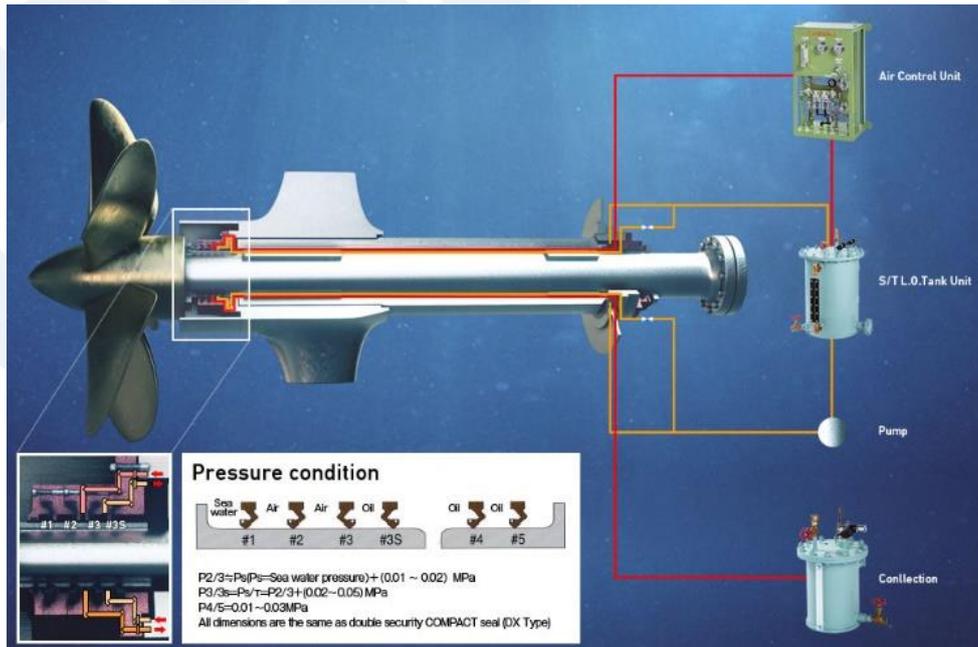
Stern Tube Air Seal (Courtesy of Eagle Industry Co., Ltd.)
